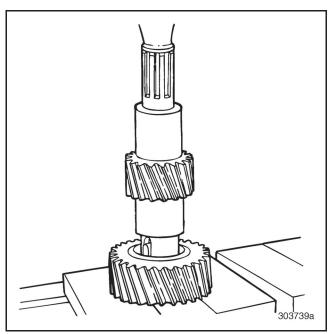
Installing Hi-Range Gear onto Mainshaft
